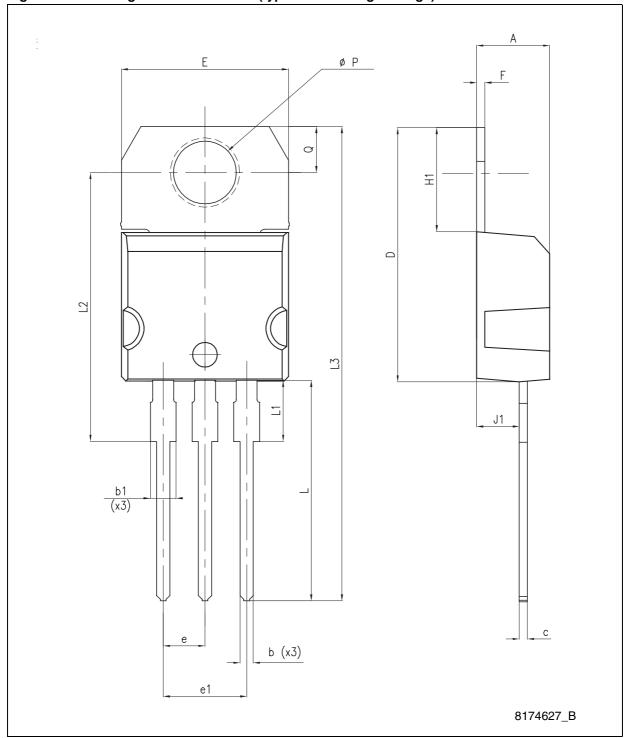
Drawing dimension TO-220 (type STD-ST Single Gauge)
